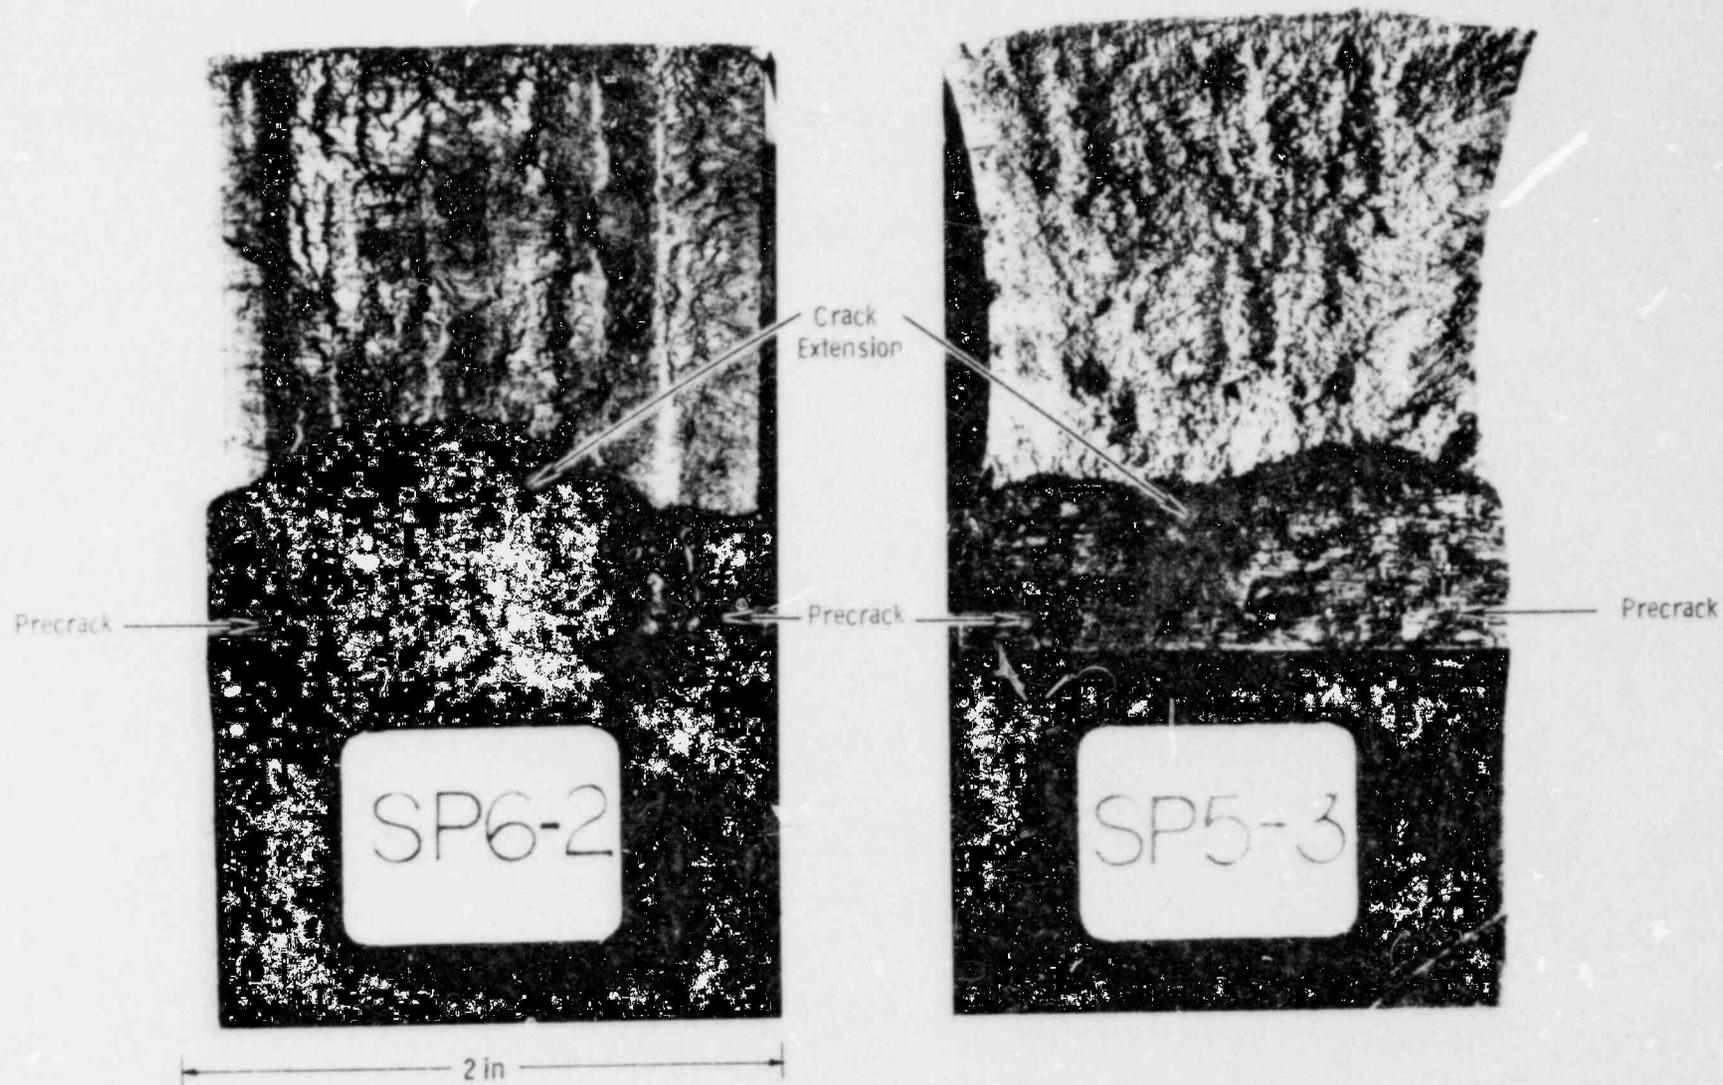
Fracture Surfaces for Two Specimens of Stainless Steel (SP6-2) and Inconel (SP5-3) Weldments Tested at 600°F
